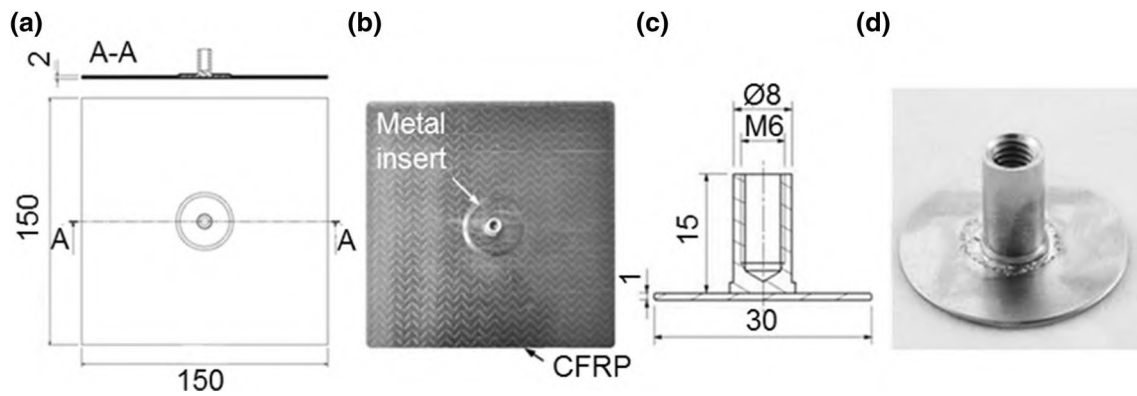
a, b Dimensions and representative picture of the D30H1 specimen. c, d Dimensions and representative picture of the D30H1 insert (after Langlais [3])
